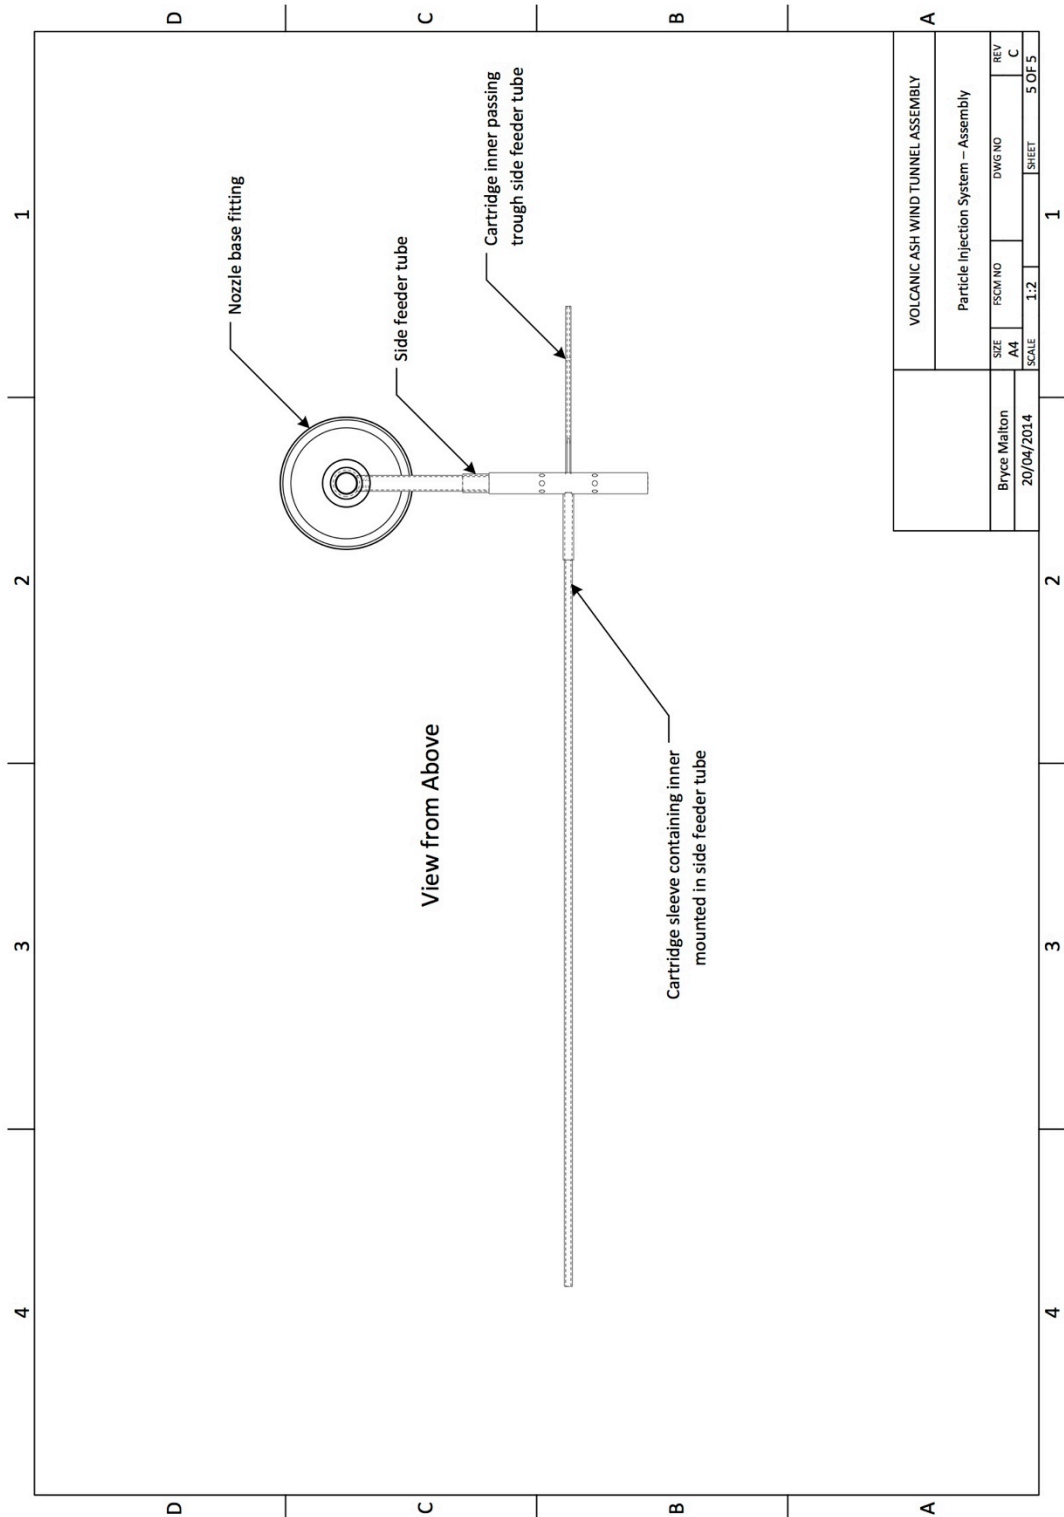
Revision 2 high-pressure air nozzle view from above showing the general arrangement of the side feeder tube installation.
